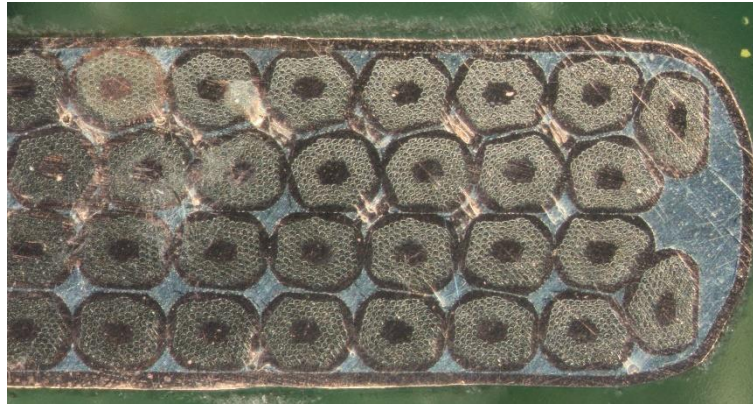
Cross-section of a crimped soldered splice. The bottom of the u-foil is visible on the right.
